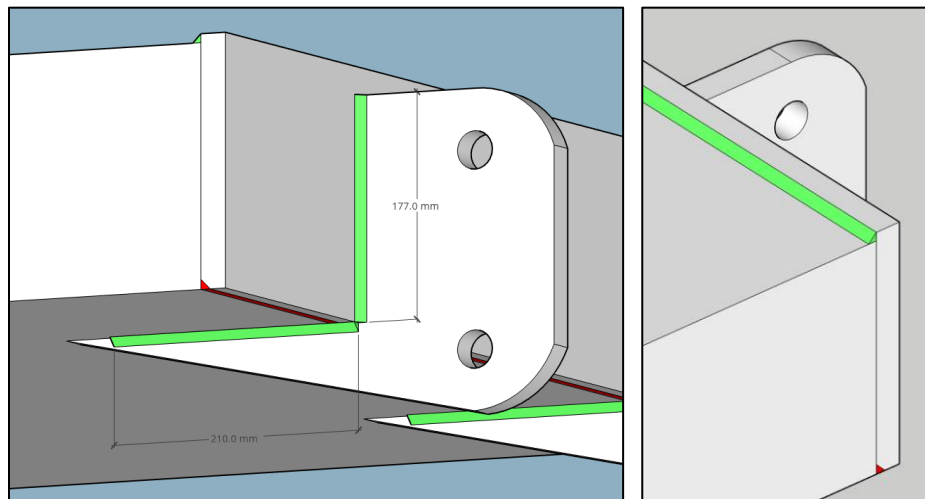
Welds in the transverse connection, green indicates fillet welds while red is for butt welds
